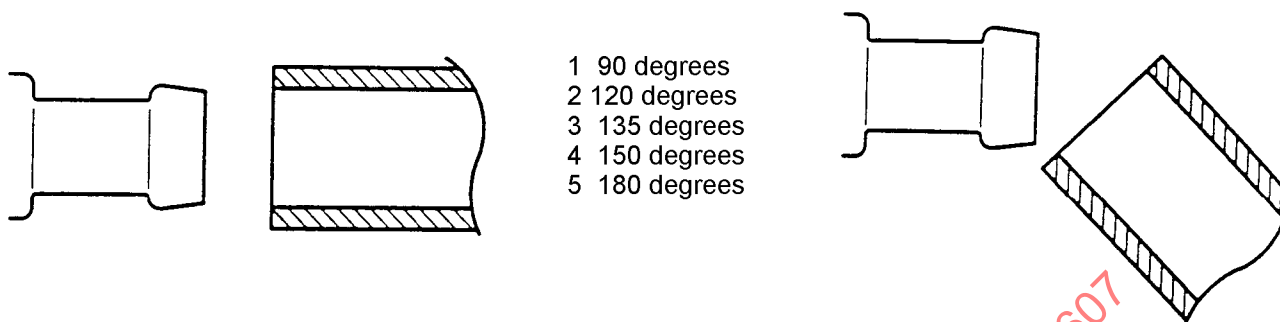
HOSE ASSEMBLY—ANGLE OF INSTALLATION
